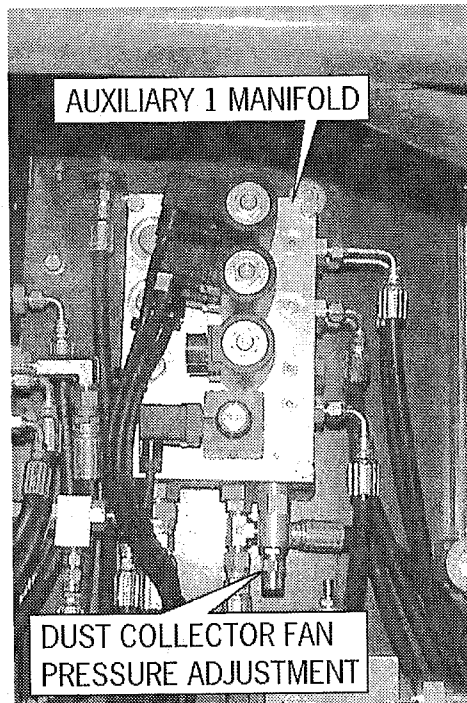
Auxiliary 1 Manifold (mounted on right side of hydraulic tank).
